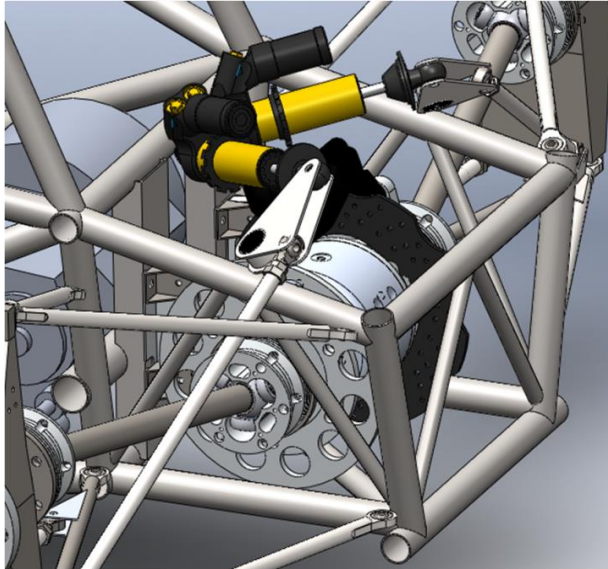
Rear rocker and shock mounting at rear of frame.
